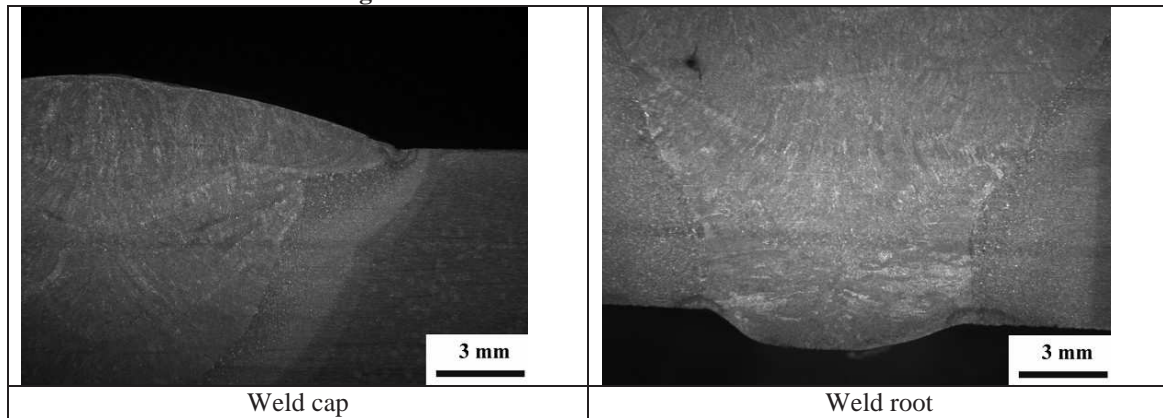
X100 FCAW - Macro of the weld cap and root
